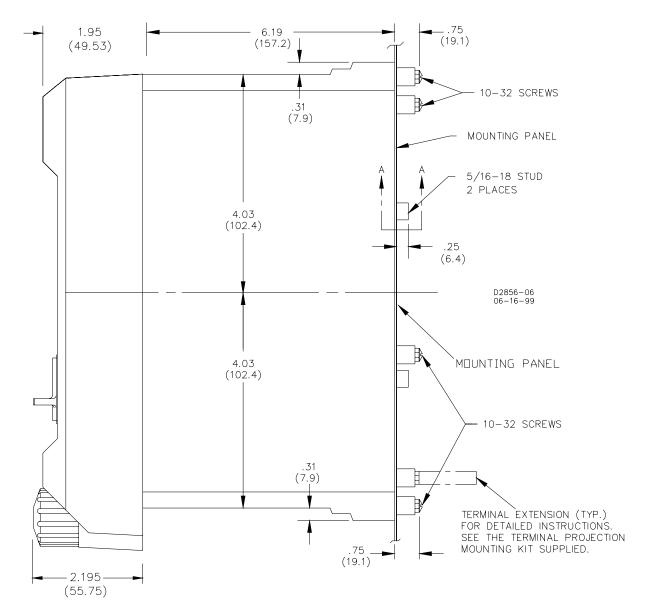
Outline Dimensions, Side View, Projection Mounted, Double-Ended Case
